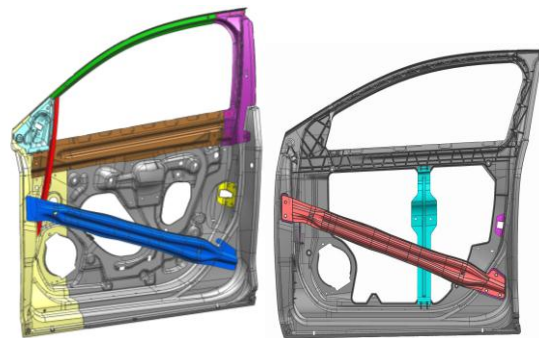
Graphics showing the components in a conventional door inner assembly (left) and in a die-cast magnesium (gray) door inner assembly (right). Not shown are the stamped outer panels and the stamped outer beltline reinforcements, which would be similar for both assemblies.
